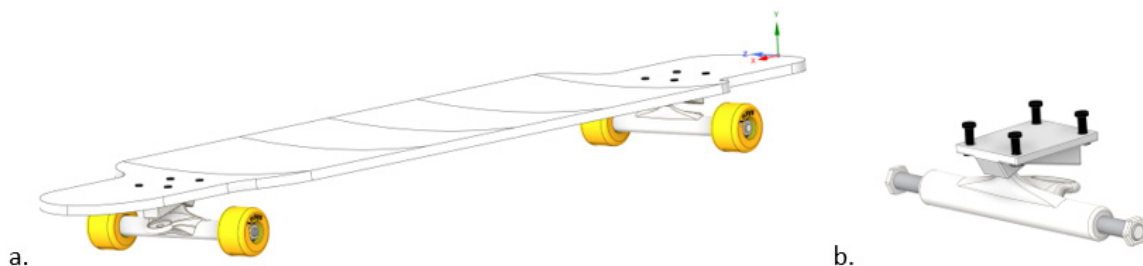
(a) Longboard Assembly, (b) Truck Assembly Detail
